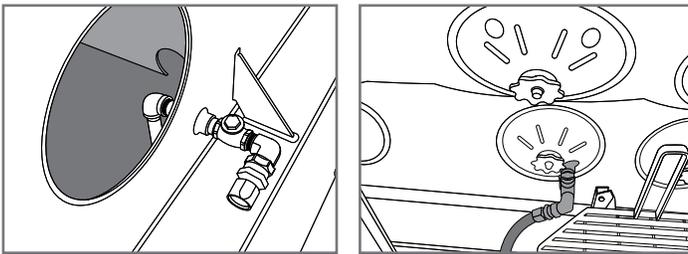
Typical oil suction port installations for railroad applications: near third inspection cover (left) and through cover (right).
